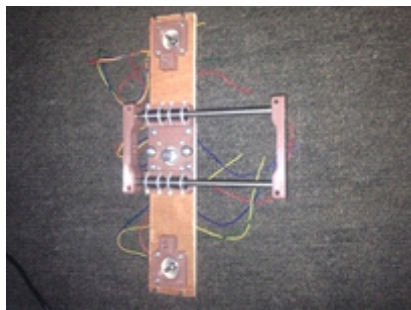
y-axis Fabricated with Plywood, Stainless Steel Rods, 3D Printed Parts and Stepper Motors.
